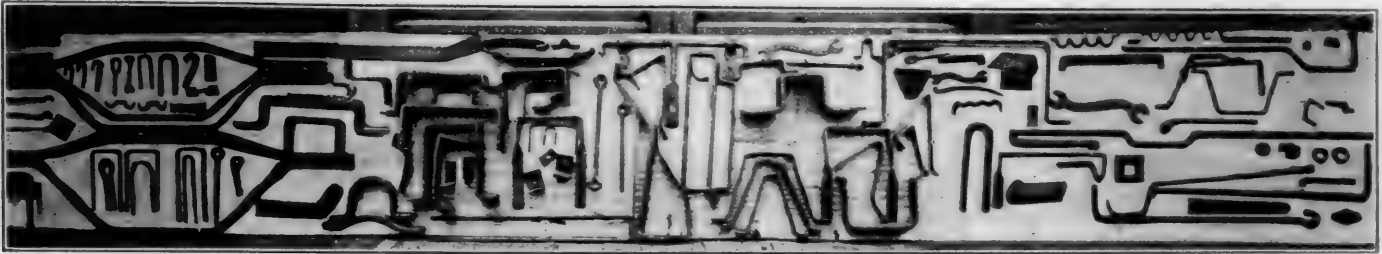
EXAMPLES OF WORK DONE ON FORGING MACHINES AND BULLDOZERS AT TOPEKA.
